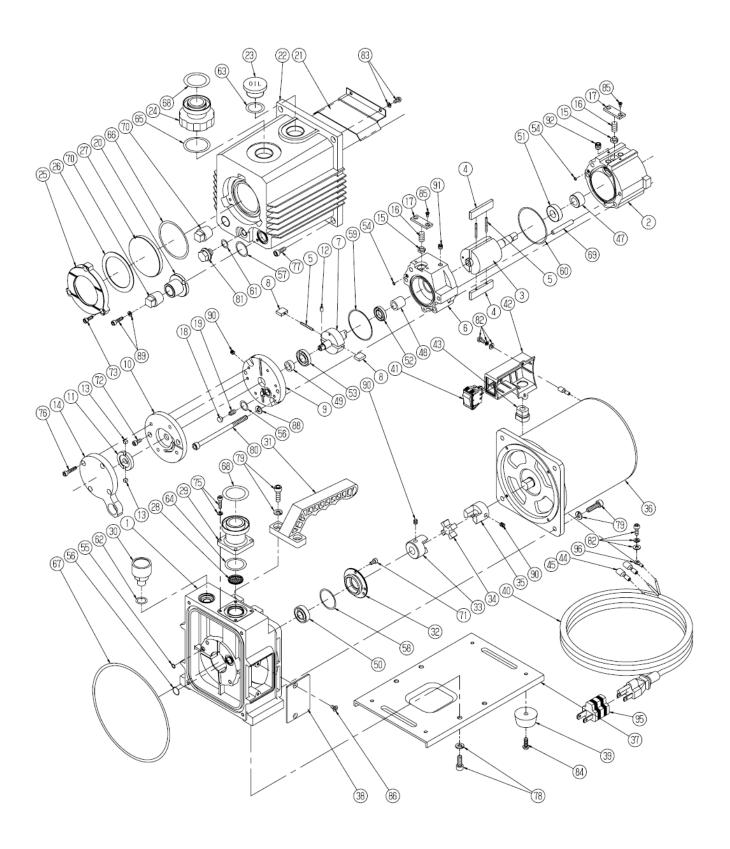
Disassembly drawing of GCD-051X oil sealed rotary vacuum pump
